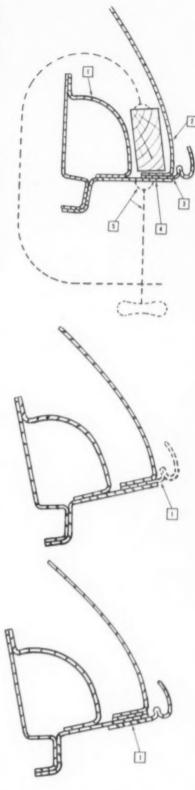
Installing new drip moulding at proper location: i. puddle-weld through holes in new drip moulding.
